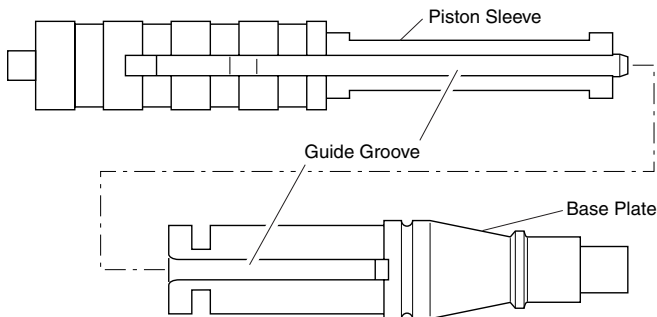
Sliding Base Plate Onto Piston Sleeve
